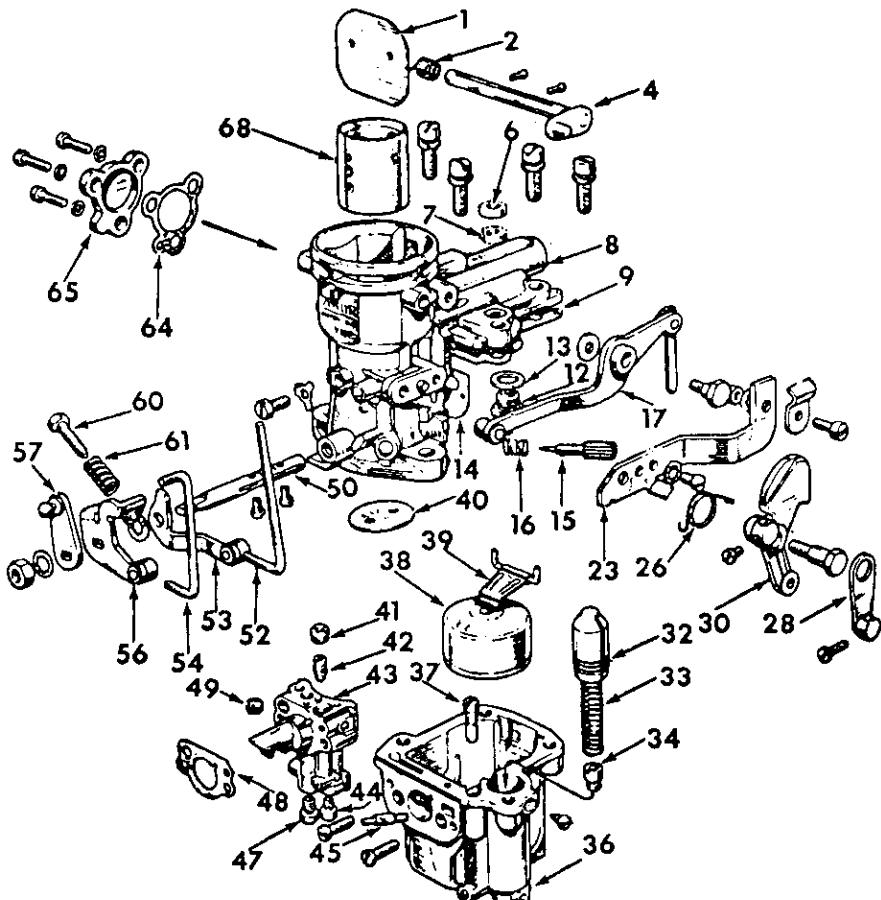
Exploded view of Model VNP Zenith downdraft carburetor used on late Model B-414 tractors.
